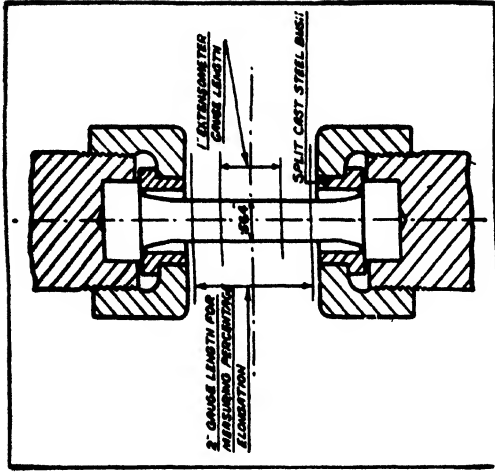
GRIPS RECOMMENDED FOR MAKING TENSILE TESTS OF STANDARD TEST PIECES
